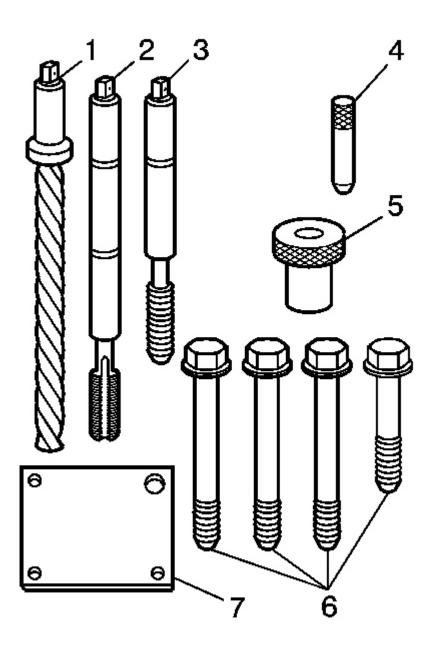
View Of Cylinder Head Bolt Hole Required Tools Courtesy of GENERAL MOTORS CORP.
